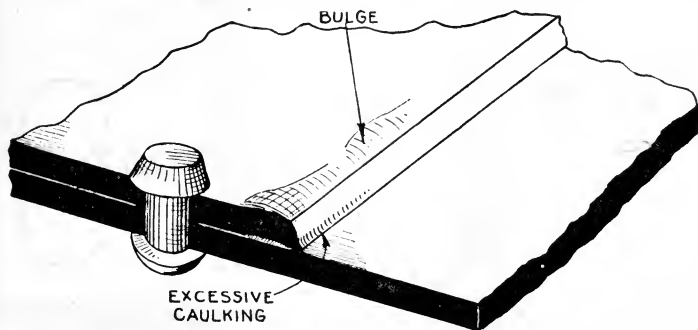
,195.—*What to look at, 6: Excessive caulking.* Too much pressure brought on the plate edge will cause it to bulge between the edge and rivet leaving no contact except at the edge to form a tight joint.
